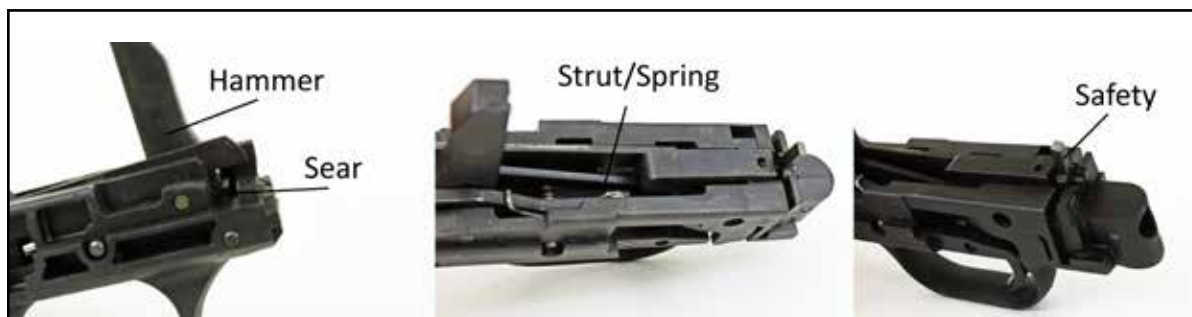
Parts of a pump-action FCG that could cause a failure to cock.
